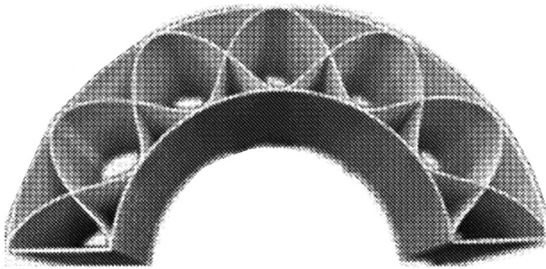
A method for manufacturing lightweight structure of continuous fiber-reinforced composite material (3D drawing layout) [80].
